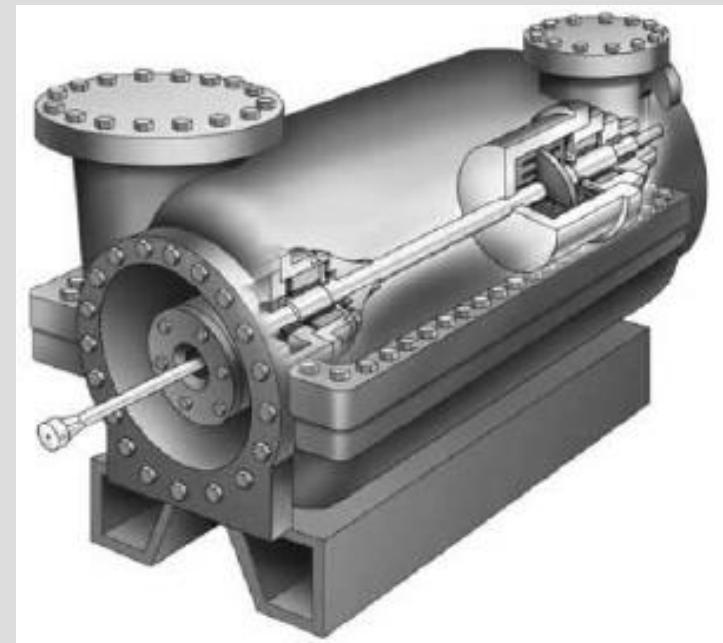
Cutaway view of a centrifugal compressor using magnetic bearings
